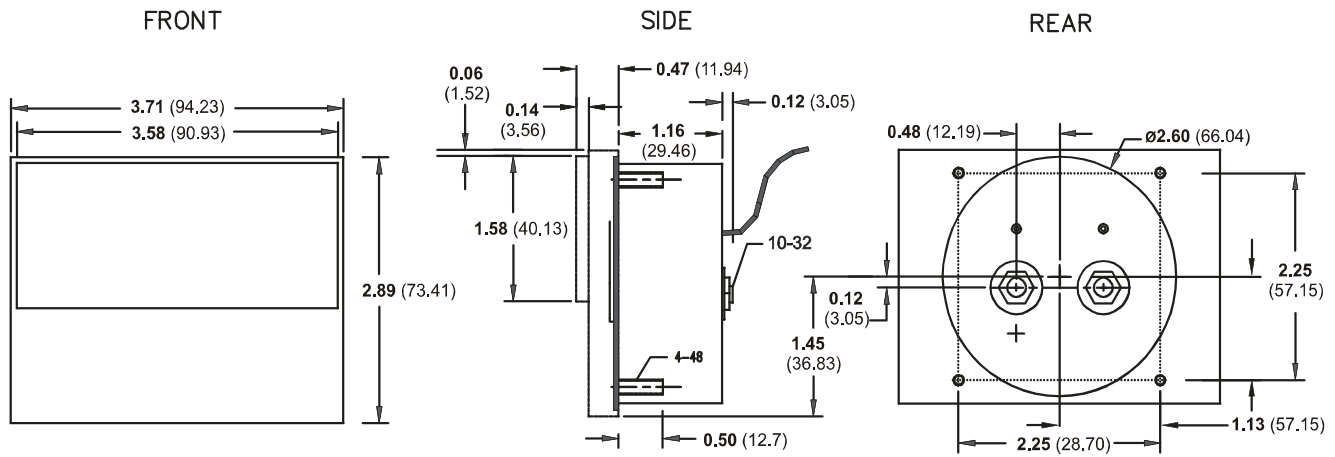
OPTIONAL TENSION METER DIMENSIONS
